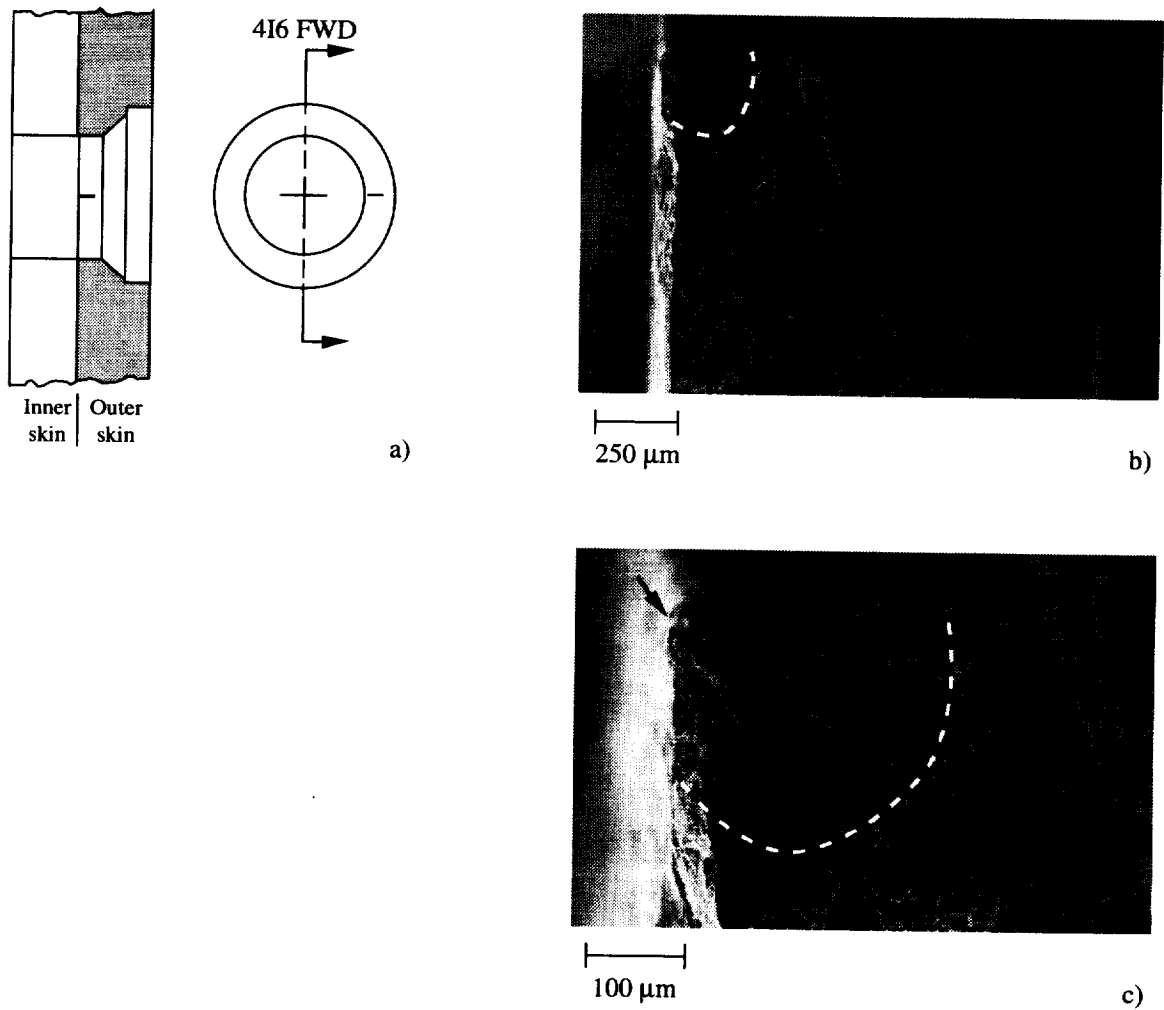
a) The schematic shows the rivet hole 416 configuration and the location of the outer skin fatigue crack oriented in the forward direction and about the 3 o'clock position. b) The SEM micrograph shows the fatigue crack fracture surface located at the outer skin rivet hole (top). The dashed line marks the fatigue crack front. c) The SEM micrograph shows the fatigue crack fracture surface at the rivet hole shank region. The arrow marks the likely site of crack initiation and the dashed line marks the fatigue crack front.
